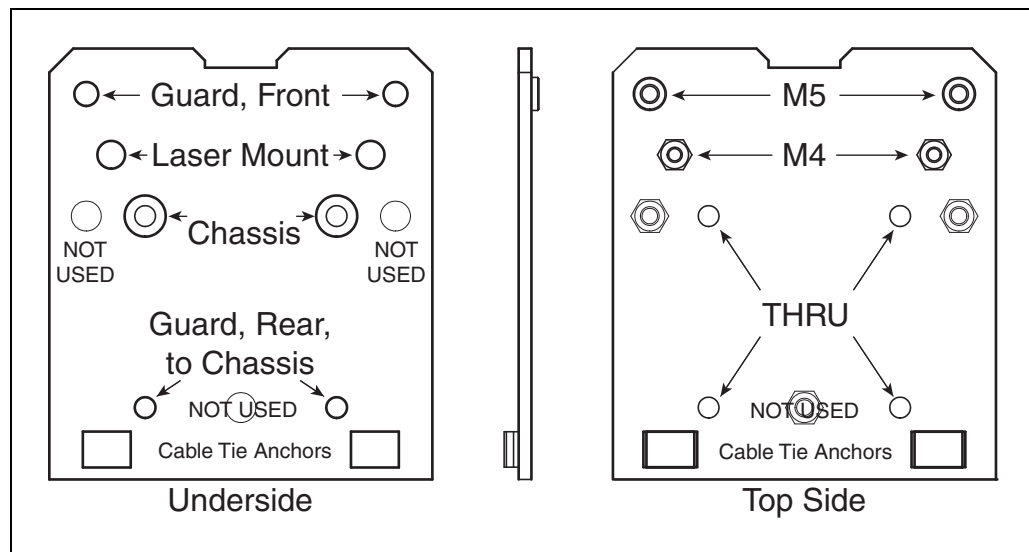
Mounting Plate for Low Front Laser and Guard
